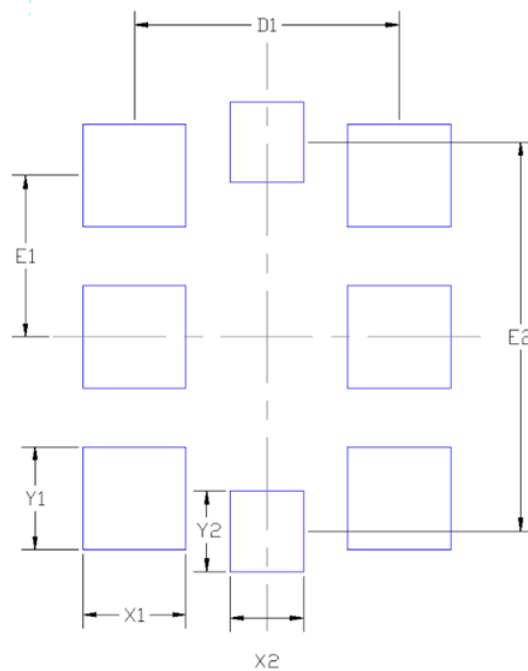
Si542 (2.5x3.2 mm) PCB Land Pattern
